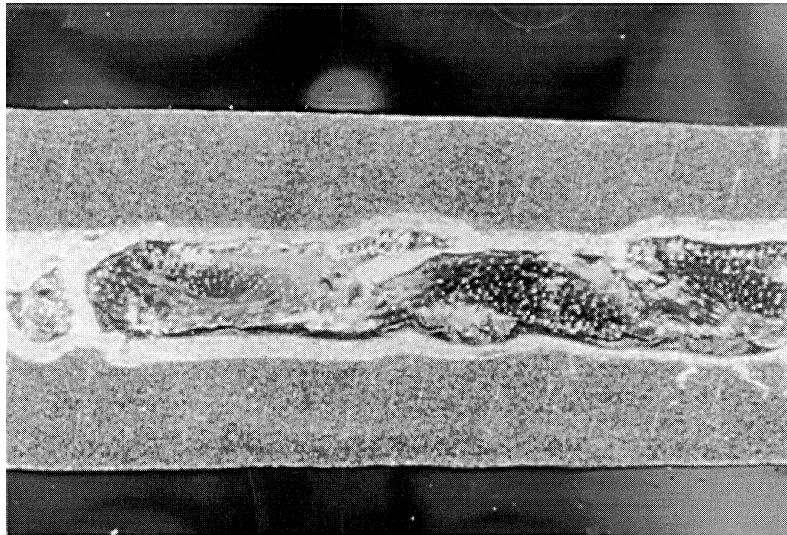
Optimised lug-substrate connection with pre-tinned welding.
